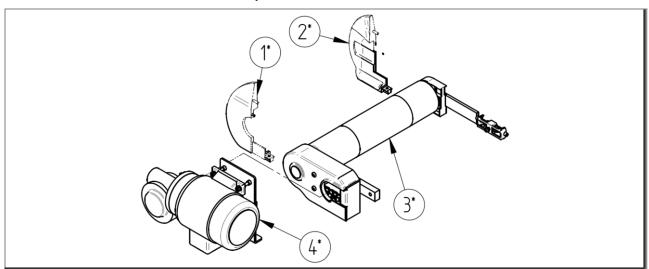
Parts list: External drive unit - position of drive unit 14 - ZZ.900.0142.00
